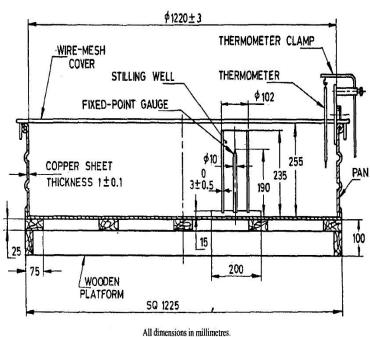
DIMENSIONS FOR PAN EVAPORIMETER
